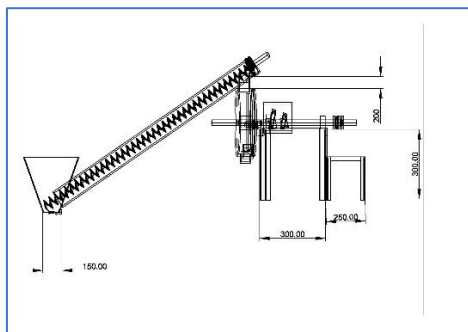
Orthographic drawing of the palm nut crack machine and conveyor
